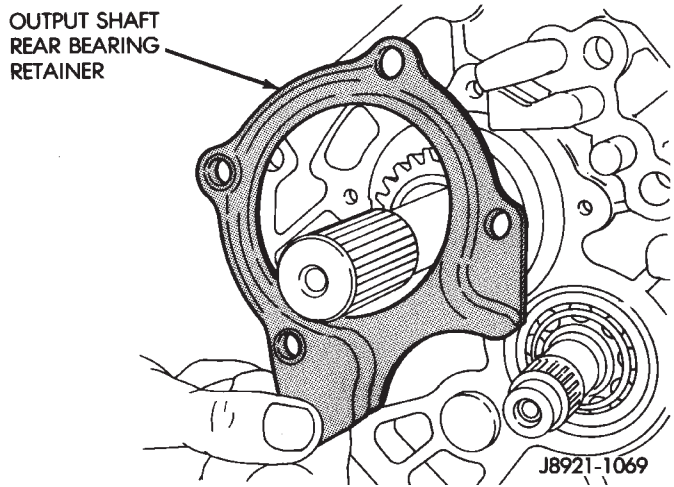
Output Shaft Rear Bearing Retainer Removal
